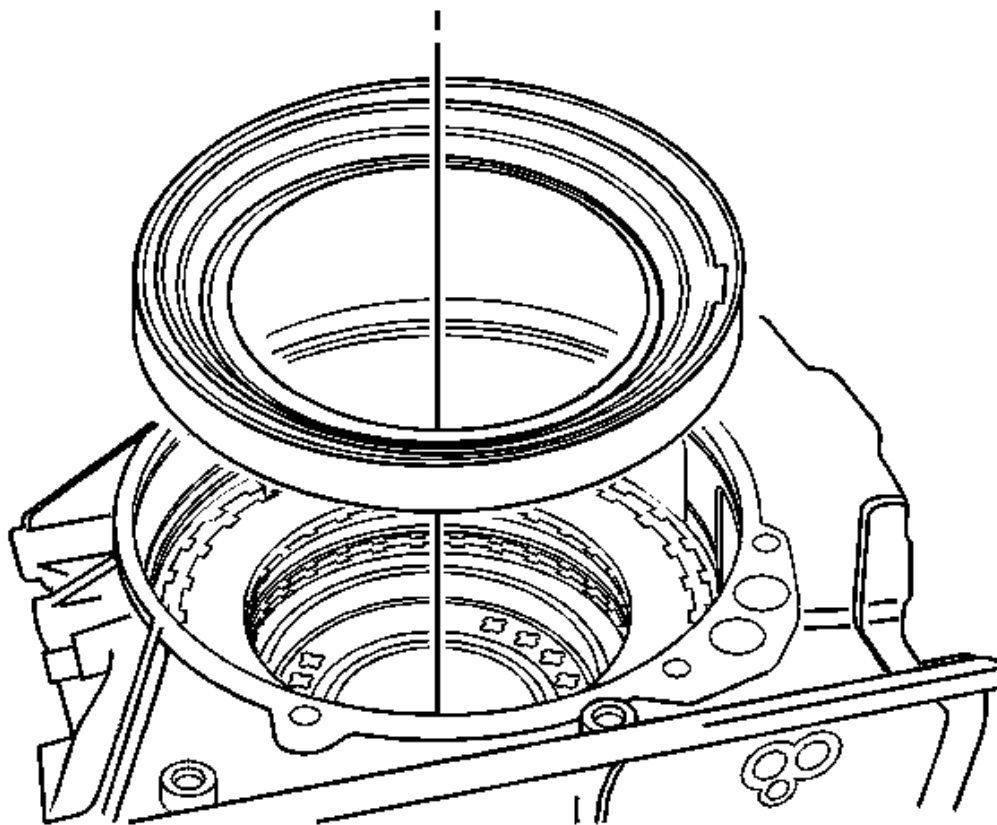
Identifying Low & Reverse Clutch Plate
